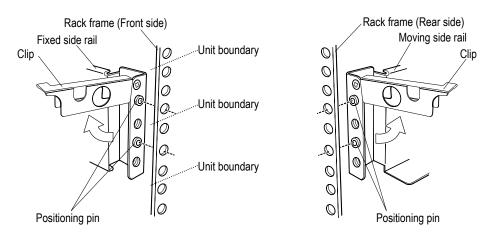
Removing Drive Box (2U) Installation Rails (for Circular Hole) - 2
